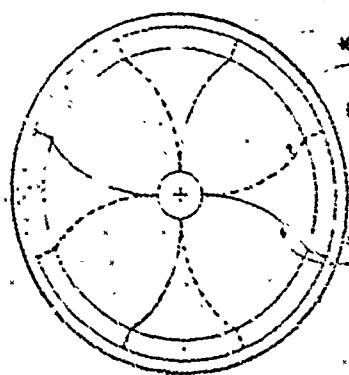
VIEW OF ROTARY EXTRUDED LINER MADE WITH SCRIBED BLANK.
